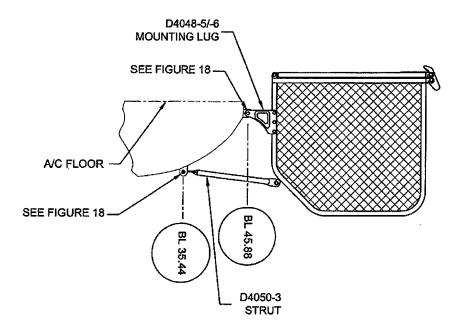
Section B-B Looking Aft at STA 155.06 (D205-541-142 Shown; D205-541-141 Opposite)
